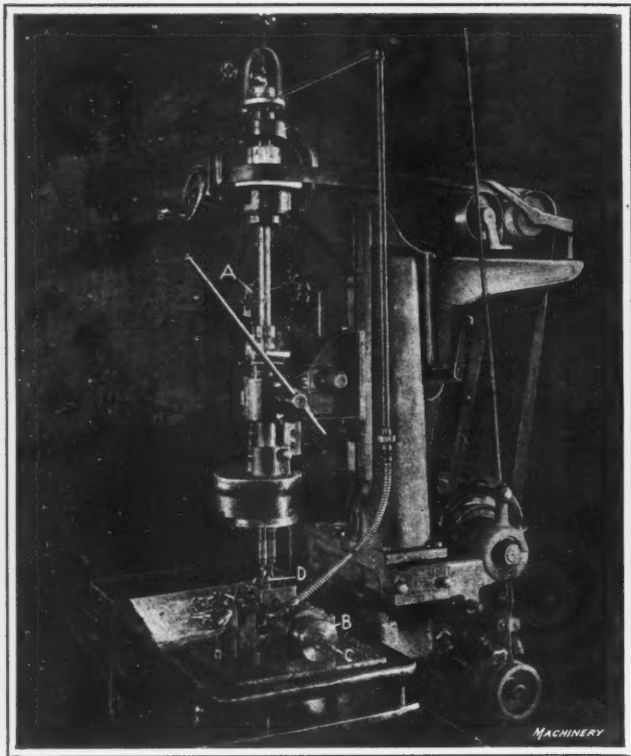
Drilling Spanner Slots in Fuse Base. Drilling Machine is equipped with Special Two-spindle Head and Air-operated Work-holding Fixture
